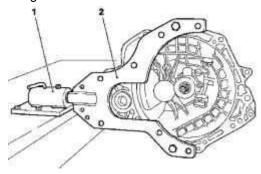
Joining crankcase to special adaptations: 1, 2 - special arrangements
